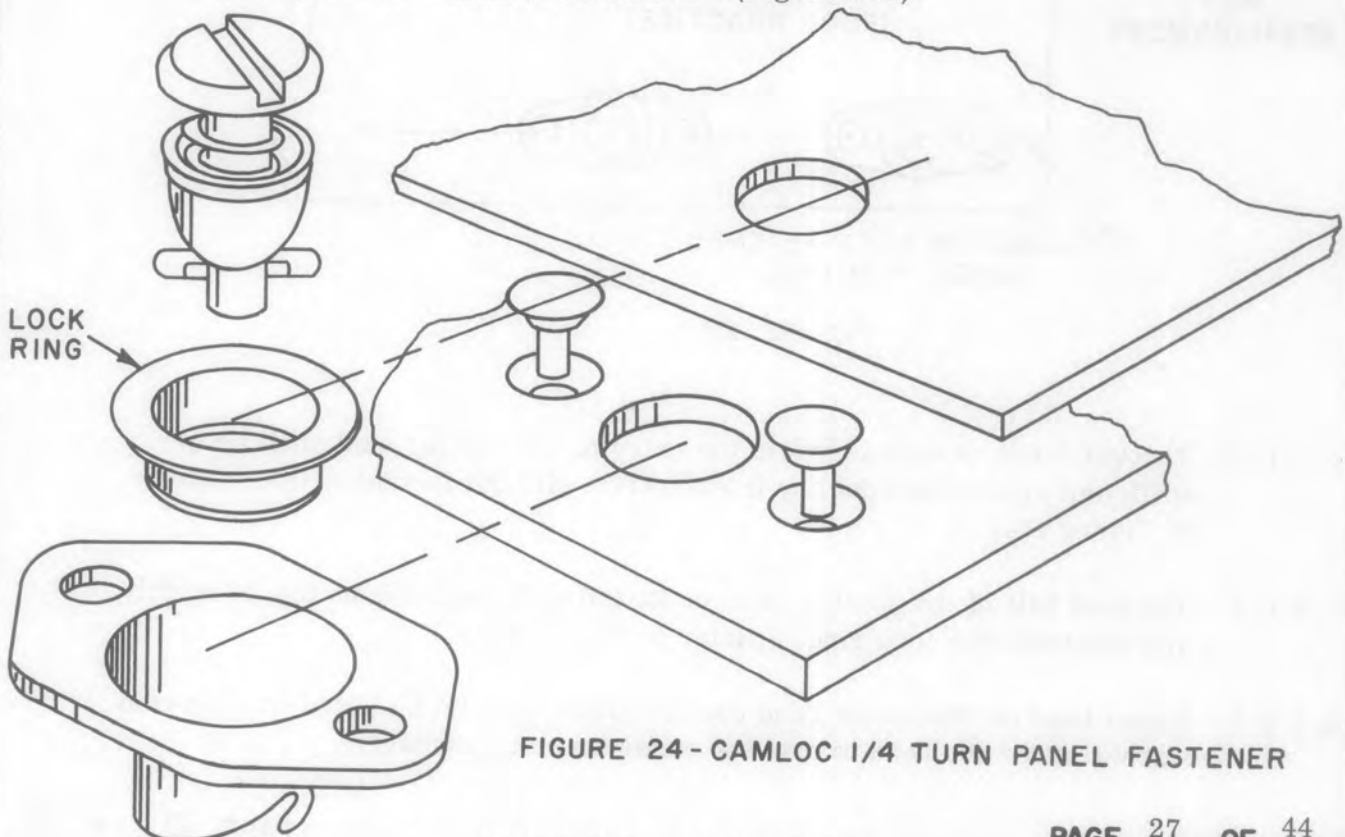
CAMLOC 1/4 TURN PANEL FASTENER
